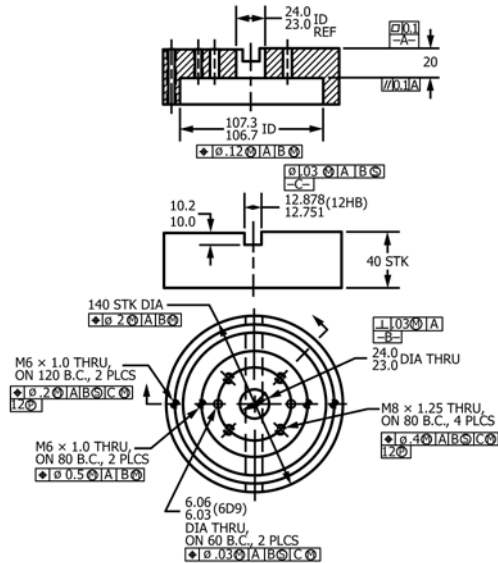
The Outer Shell of the Tension Fixture in Metric Units
